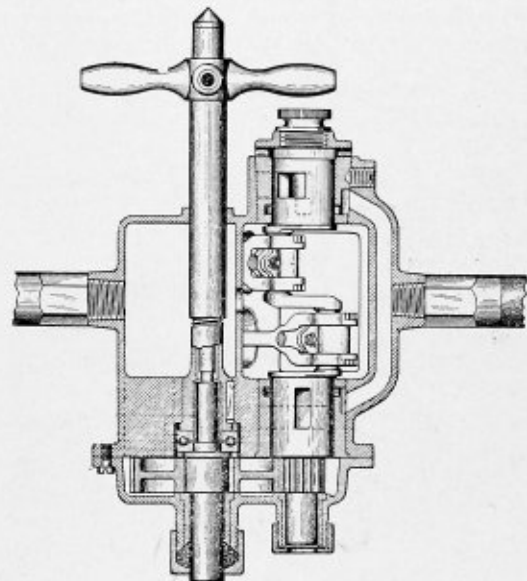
SECTIONAL VIEW OF THE CLEVELAND DRILL.
